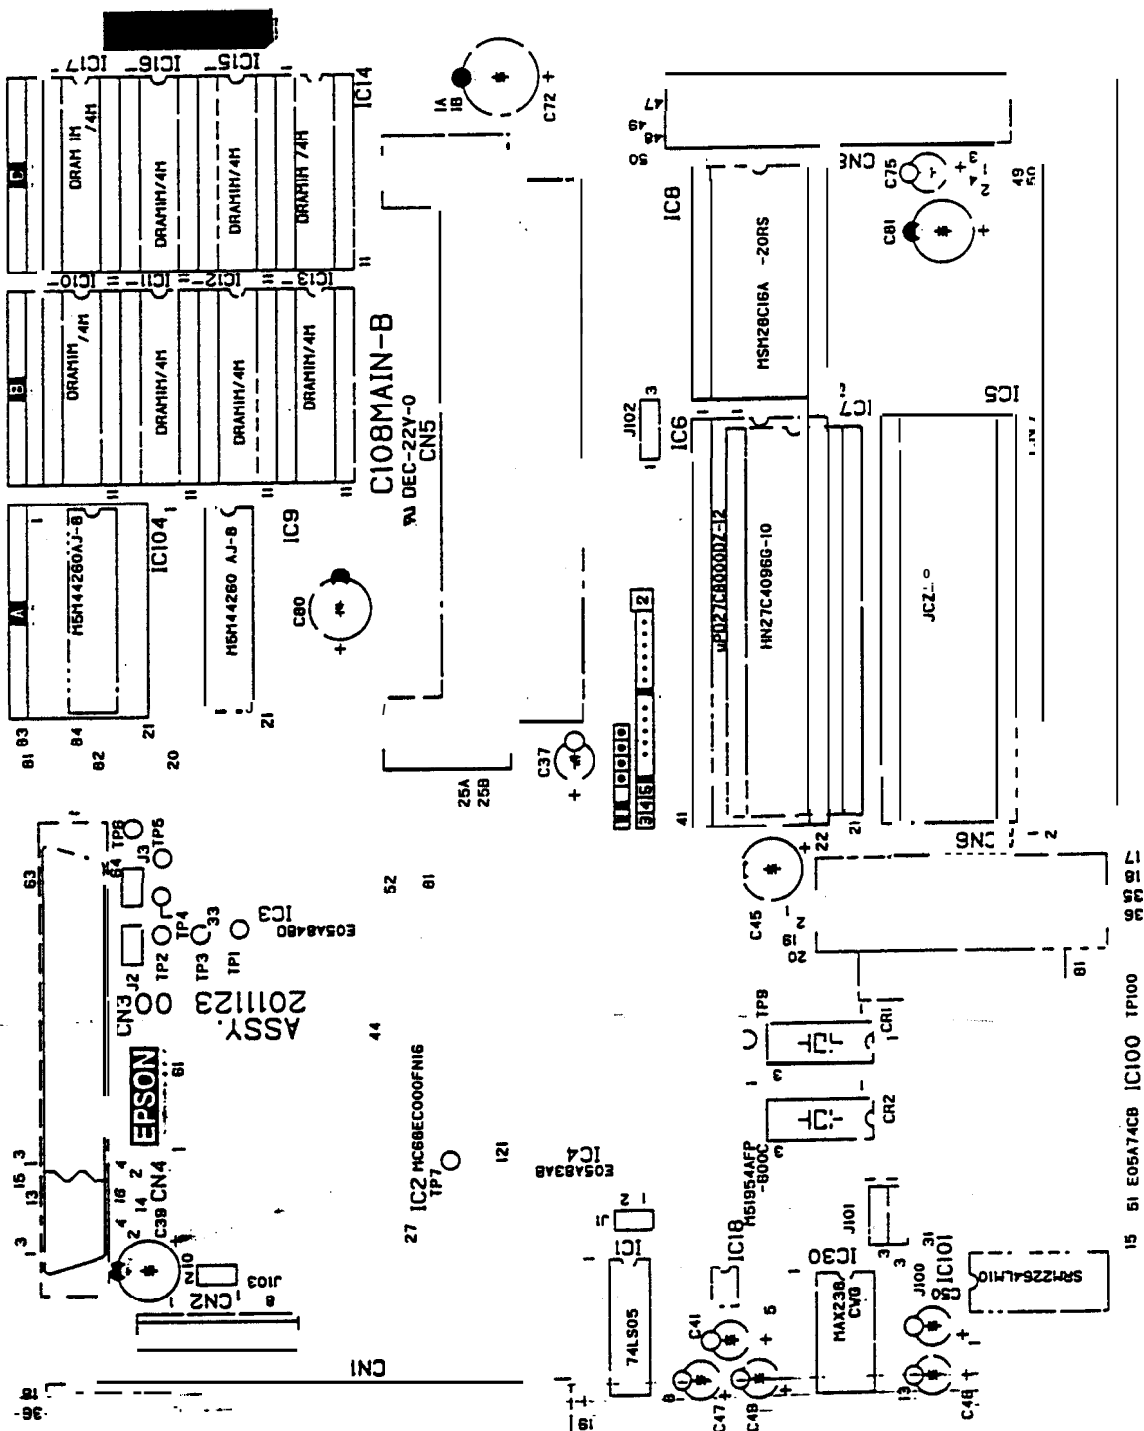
CI08 MAIN-B Board Component Layout (Front)
